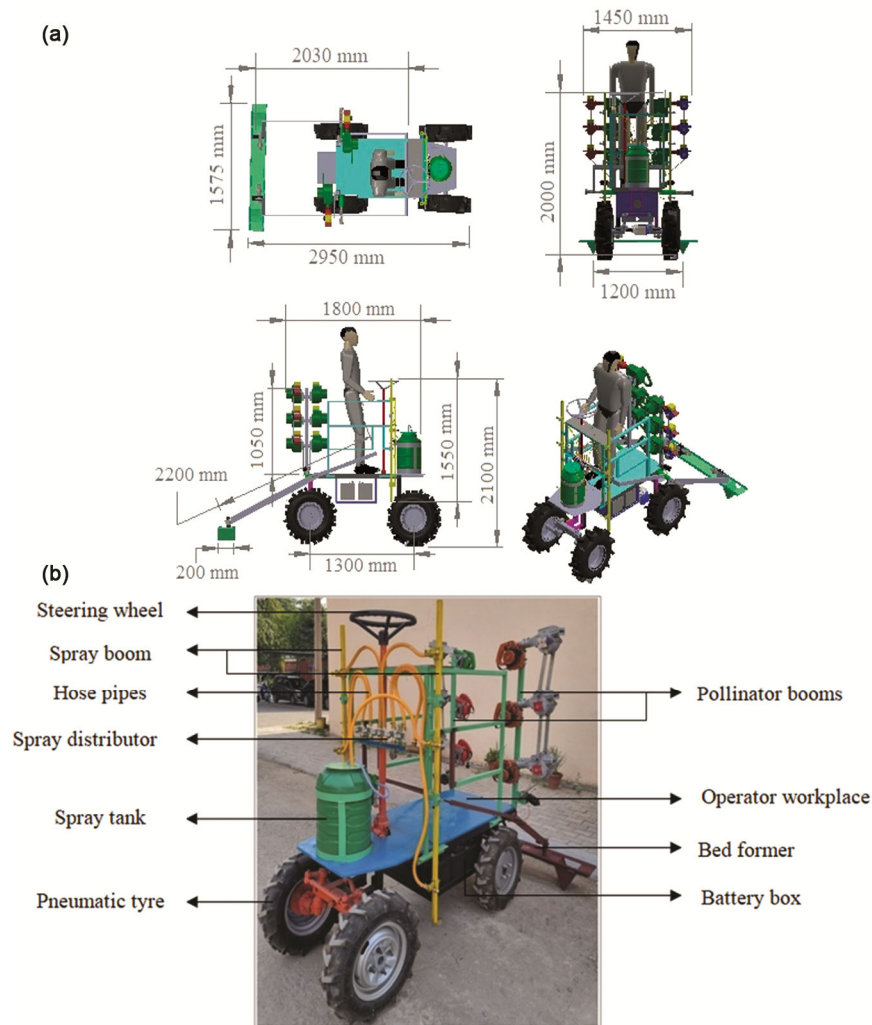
(a) CAD model, (b) Developed machine electric multi-tool carrier and its compatible equipment
